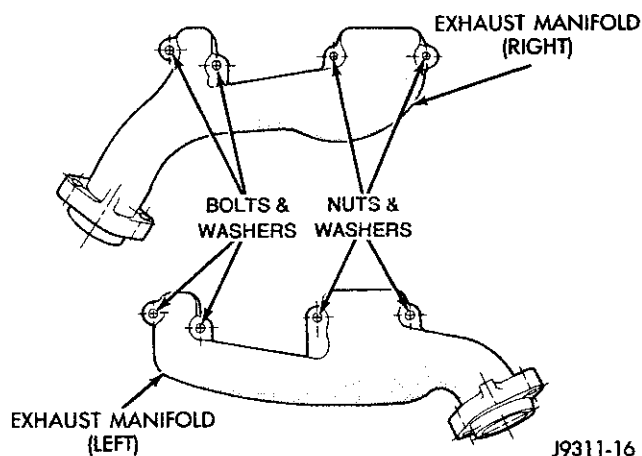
Engine Exhaust Manifold Installation—3.9L Engine
